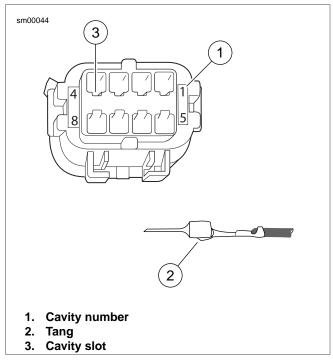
Molex Connector: Pin Cavities and Wire Terminal
